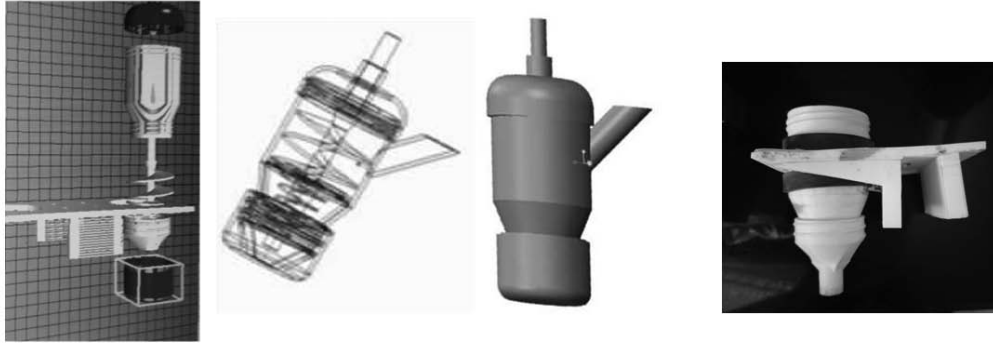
Required holder to suitably fit Extruder assembly to moving x-gentry of a 3D printer.
